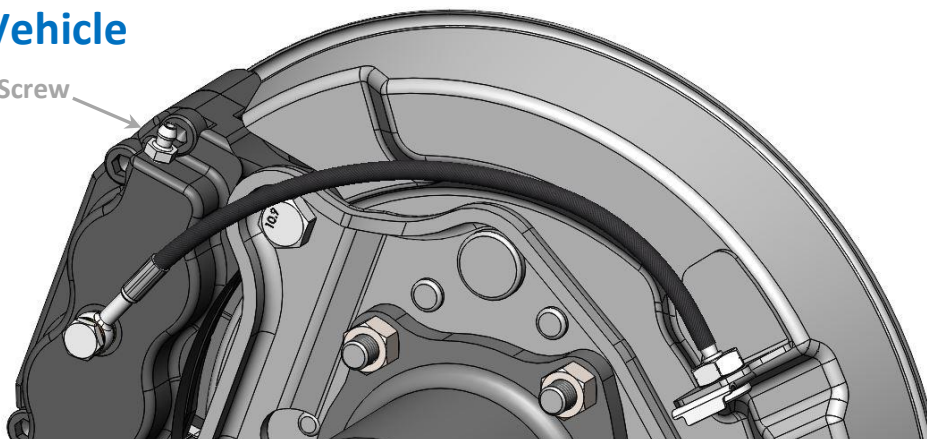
Stainless Steel Braided Hose Properly Installed (RH Shown)
